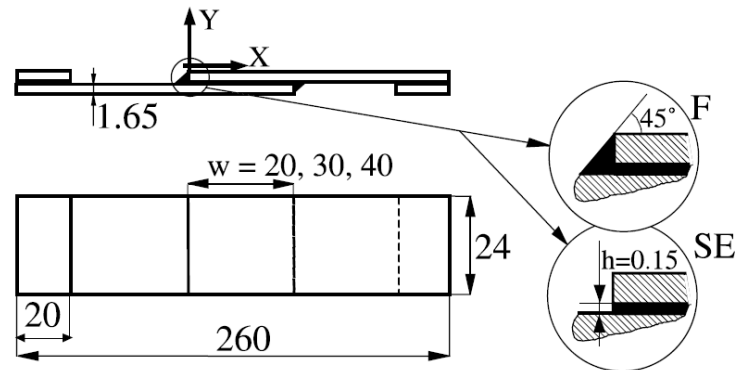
Geometry of single lap bonded joint (mm). SE, square edge joint; F, spew fillet joint [57].
